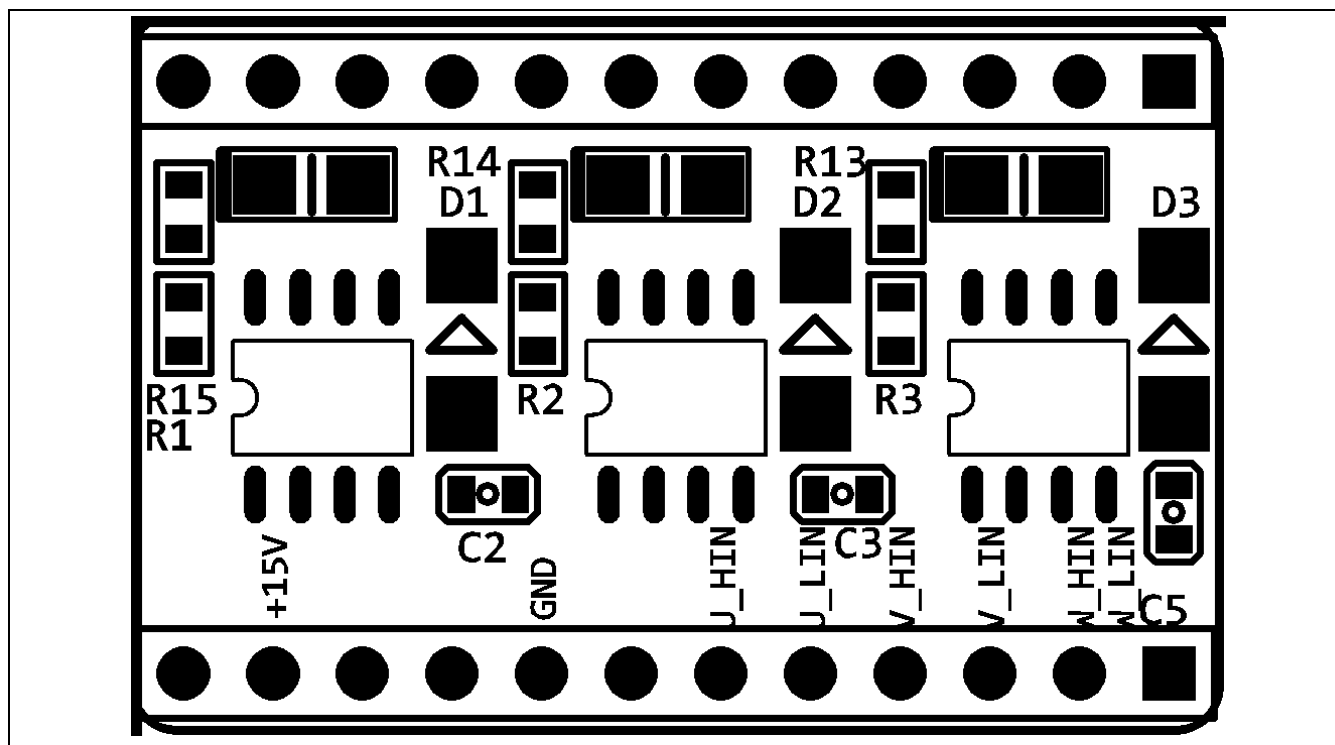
Gate Driver IR2101PCB Placement -TOP
